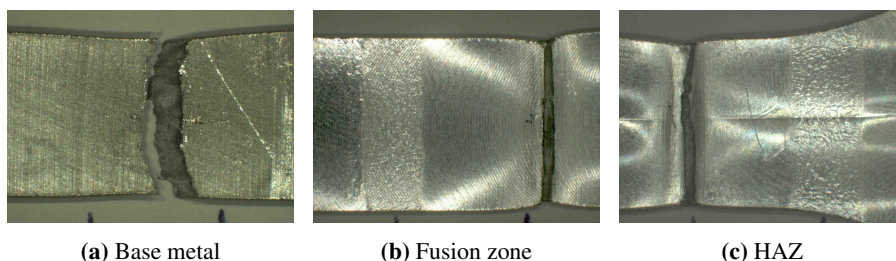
Macro images of the tensile specimens tested transverse to the welding/extrusion direction.
